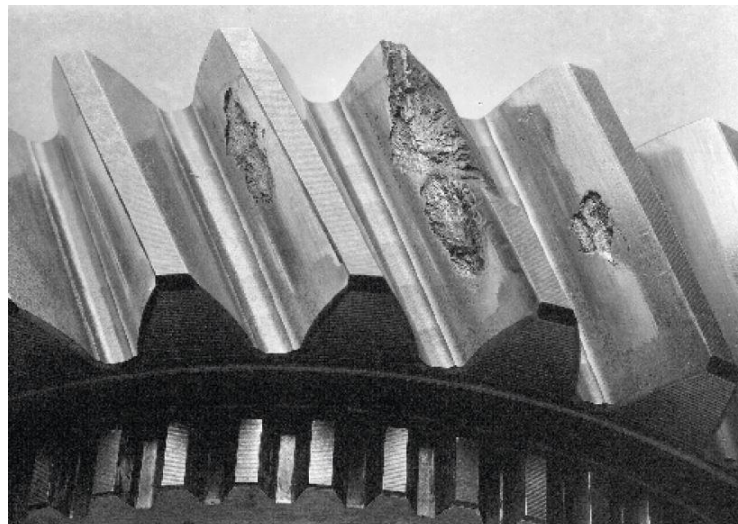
Pitting and crack of the tooth tip due to fatigue of the tooth flank [27]
